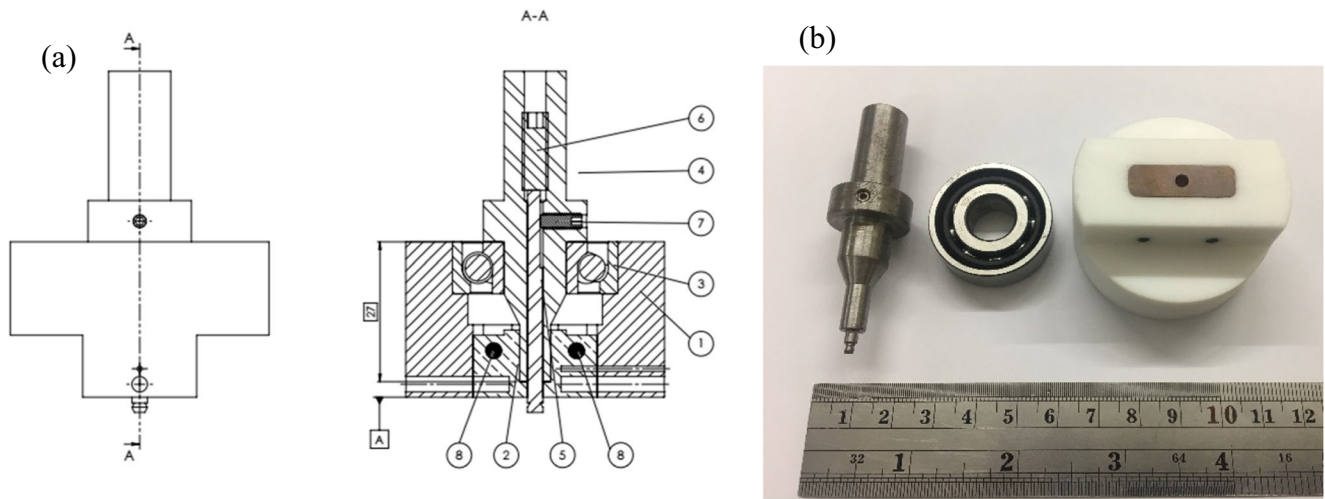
Detailed view of a tool assembly (a) and the actual welding tool (b)
